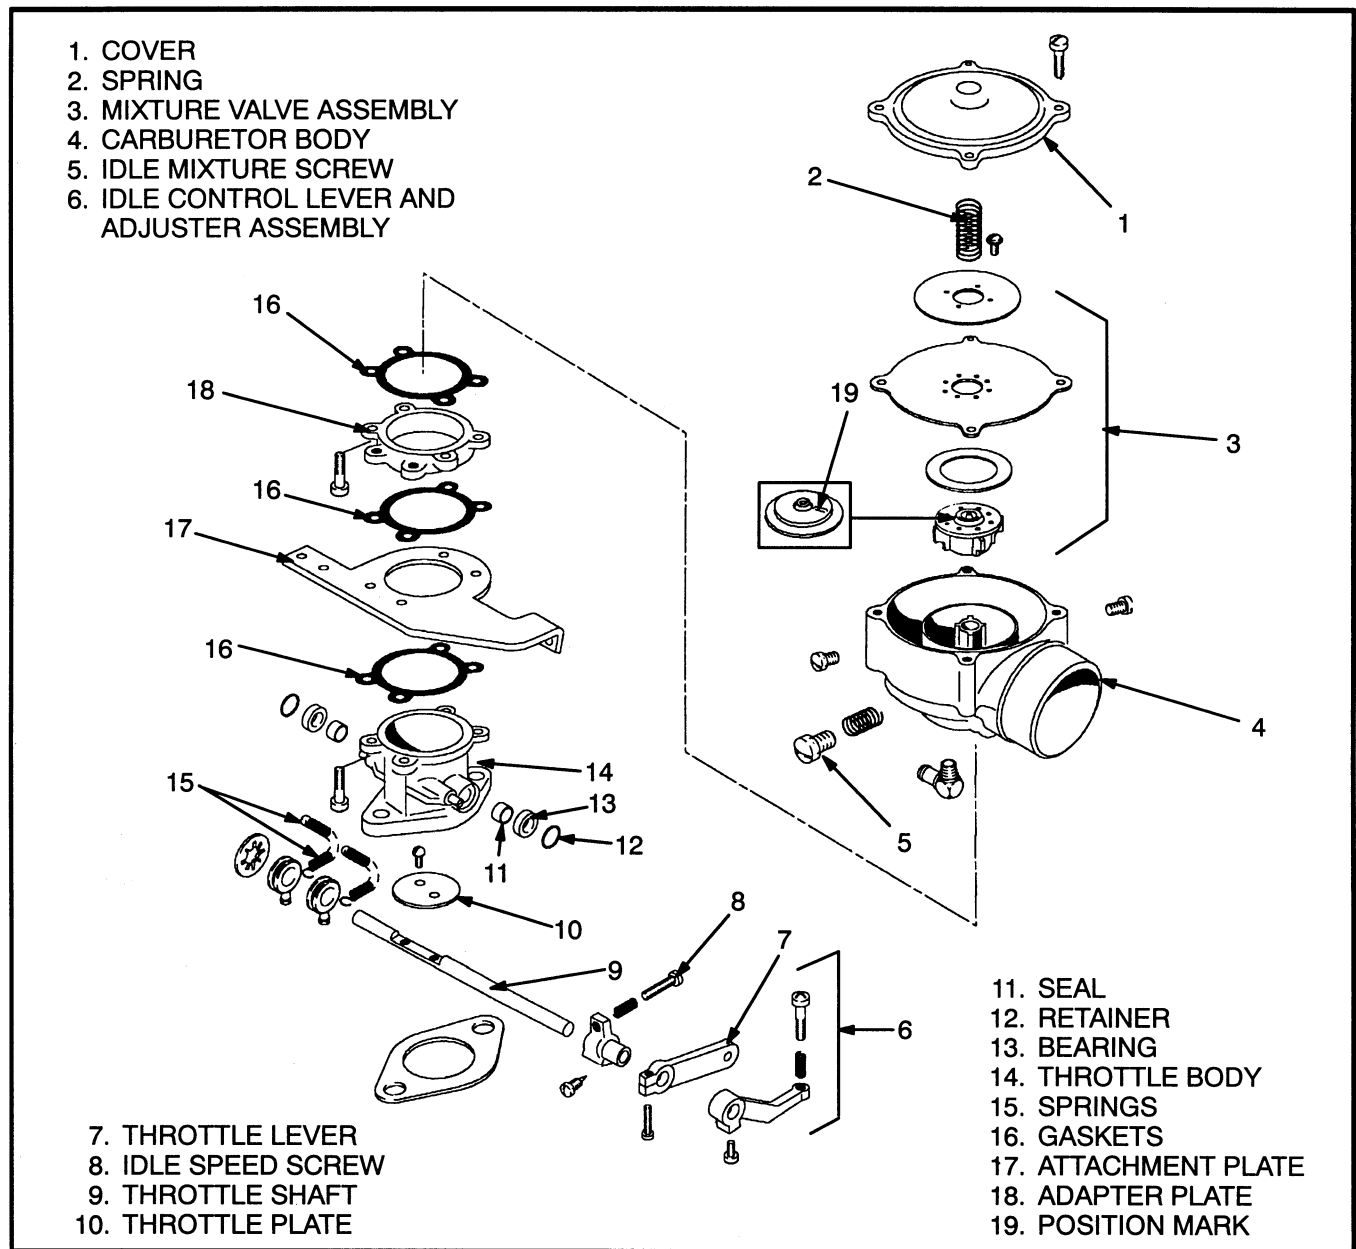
PARTS OF THE CARBURETOR, S/H2.00-3.20XM (S/H40-65XM)
